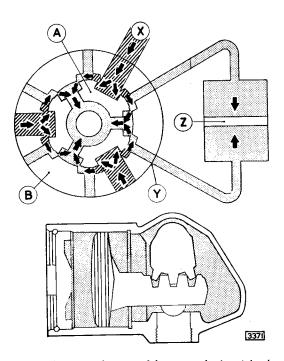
Operating diagram of the rotor valve (straight ahead).
